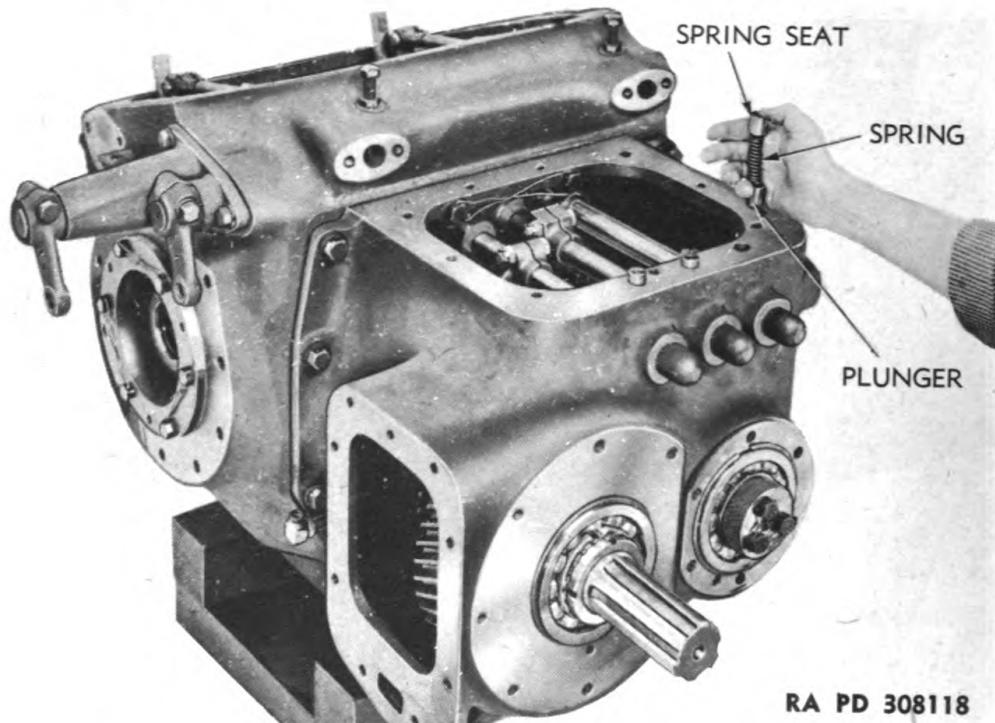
Removing Shifter Shaft Spring Seats, Springs, and Plungers
